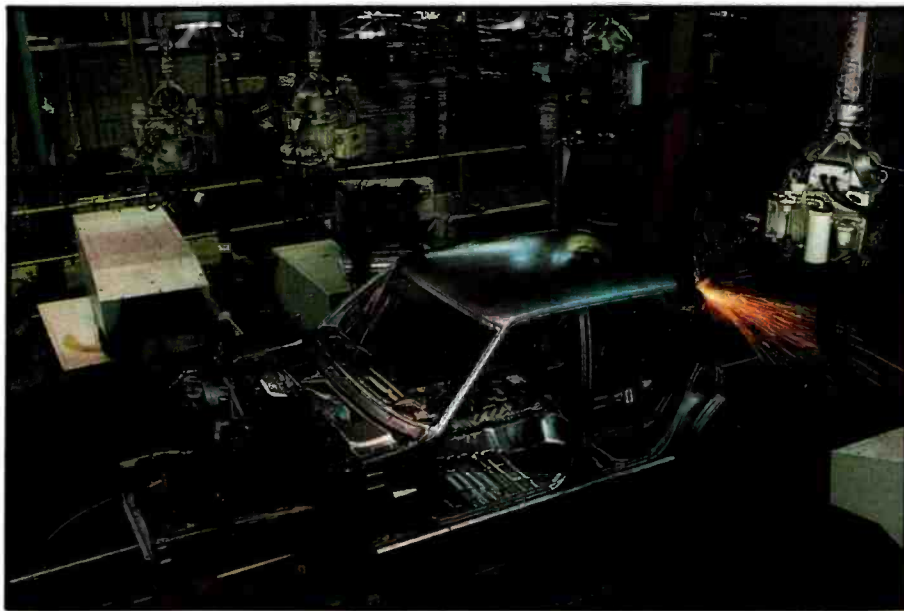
Three Unimation robots welding on an automobile assembly line. Spot welding and arc welding are two areas in which robots are used extensively by the automobile industry.
